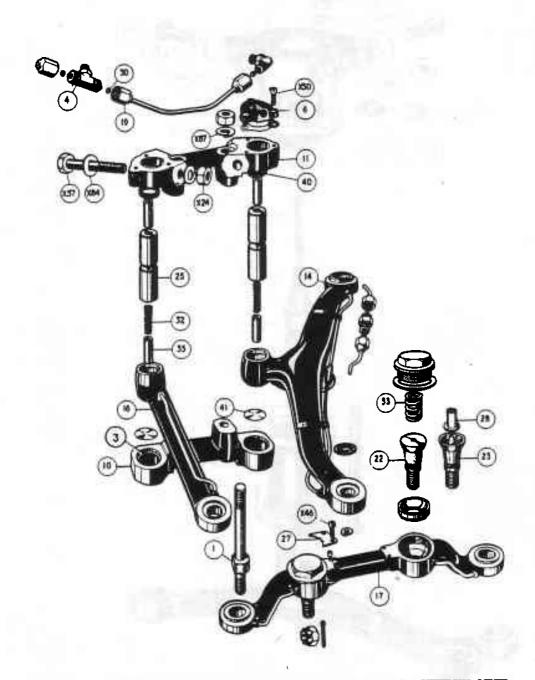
"EXPLOIDED" VIEW OF SWIVEL PIN HOUSING AND CENTRE STEERING LEVER NEW GEOMETRY FROM HENTLEY CHASSIS NO. B-1-GT, SILVER WRAITH WME-1, AND SILVER DAWN SCA-1.
